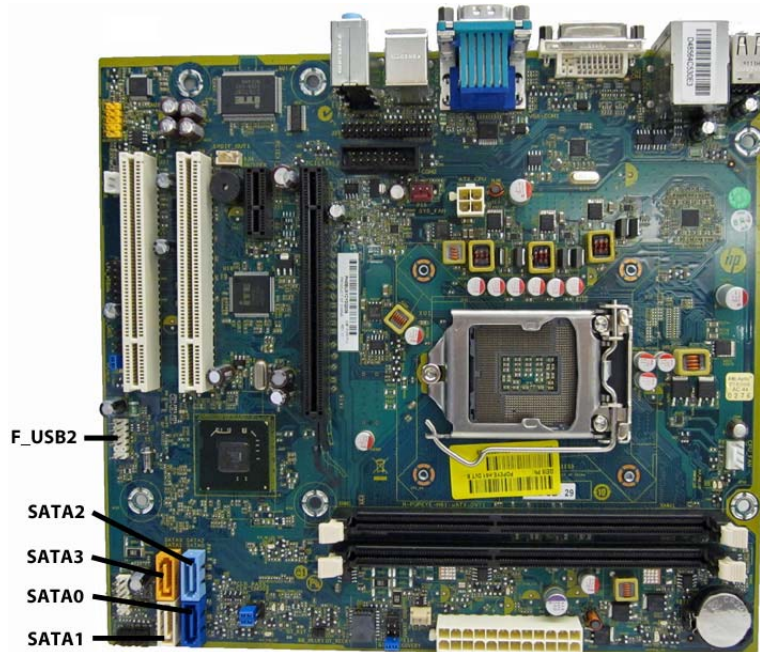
System Board Drive Connections – HP Pro 3340/3348
